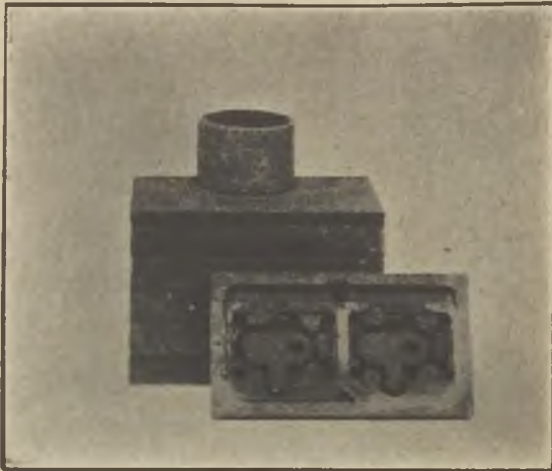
MAKING AN OIL PUMP IN STACK CORES.
